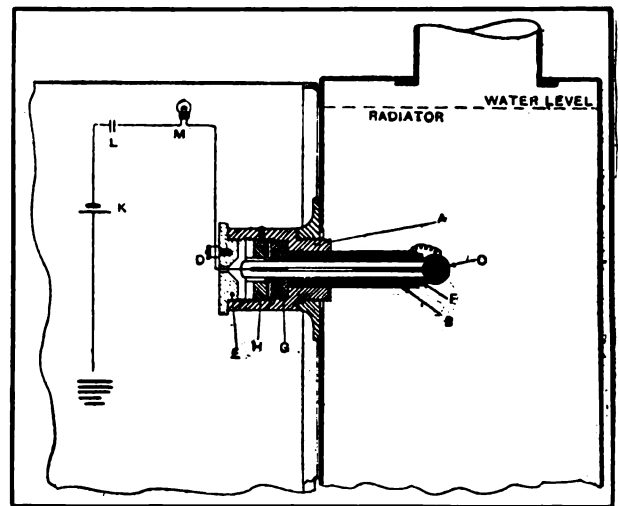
Sectional View of Thermo-Electric Indicator Installed on Radiator.
